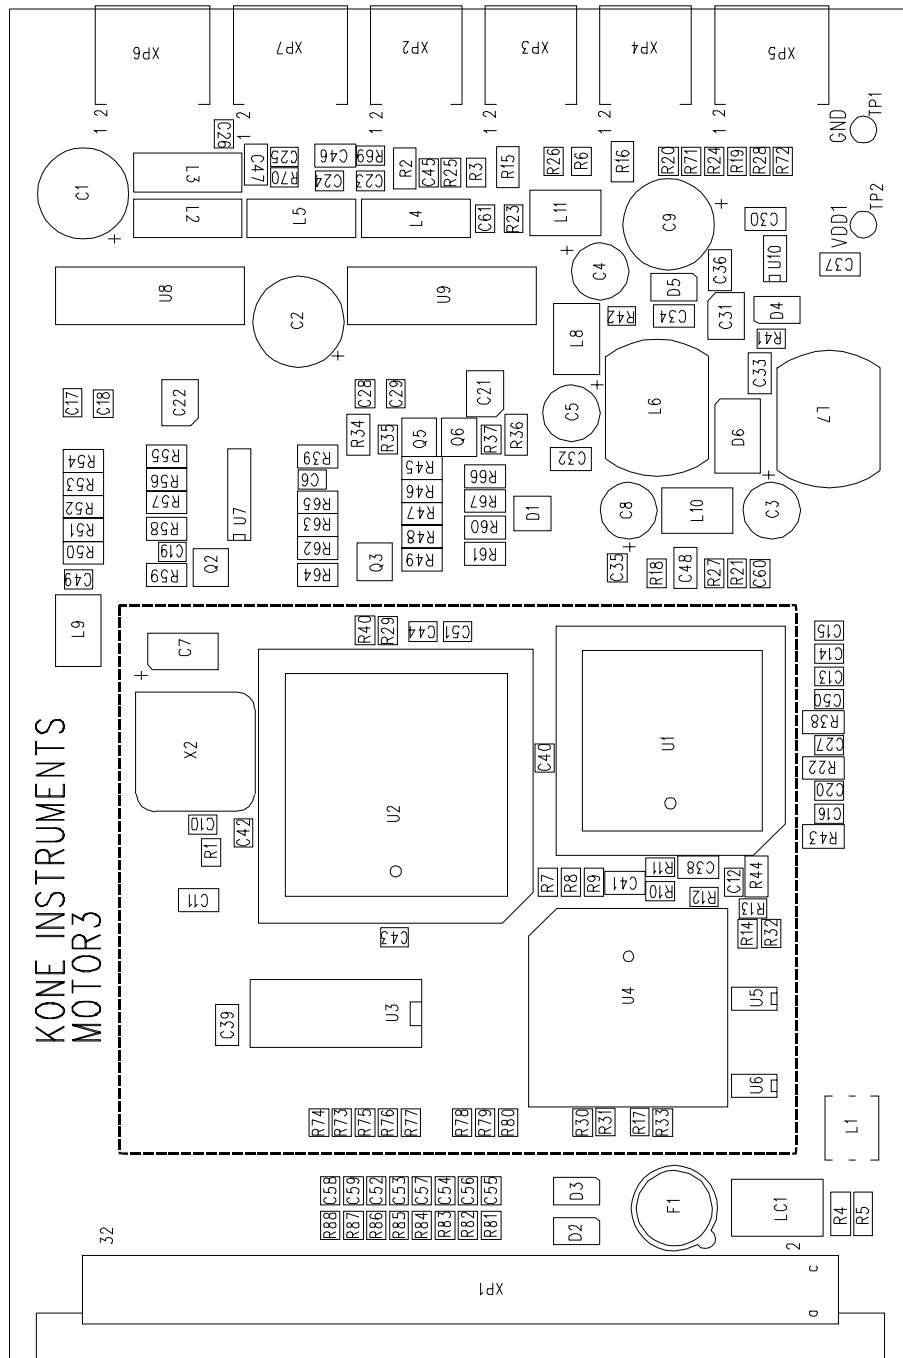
THE COMPONENT LAYOUT OF MOTOR3
